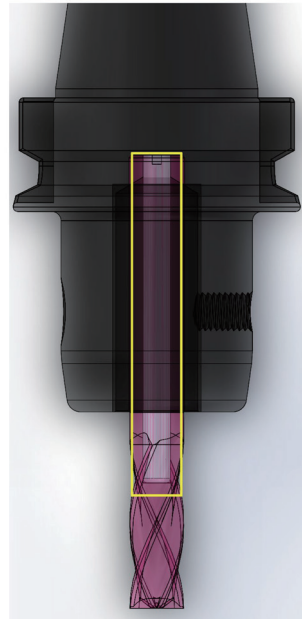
(Color online) Schematic of intelligent induction milling cutter tool holder clamping.
